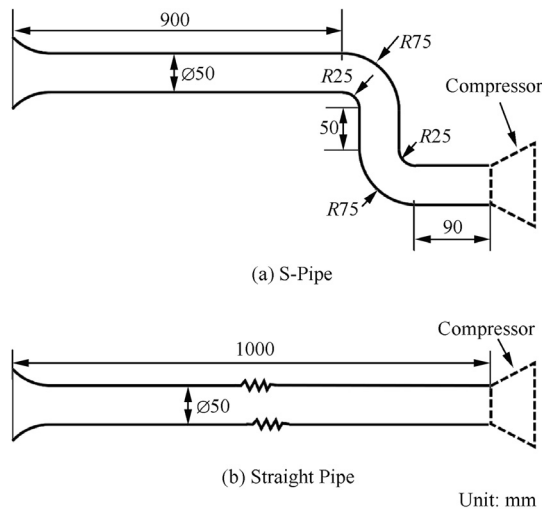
Geometric details of two inlet pipes installed upstream of compressor.
